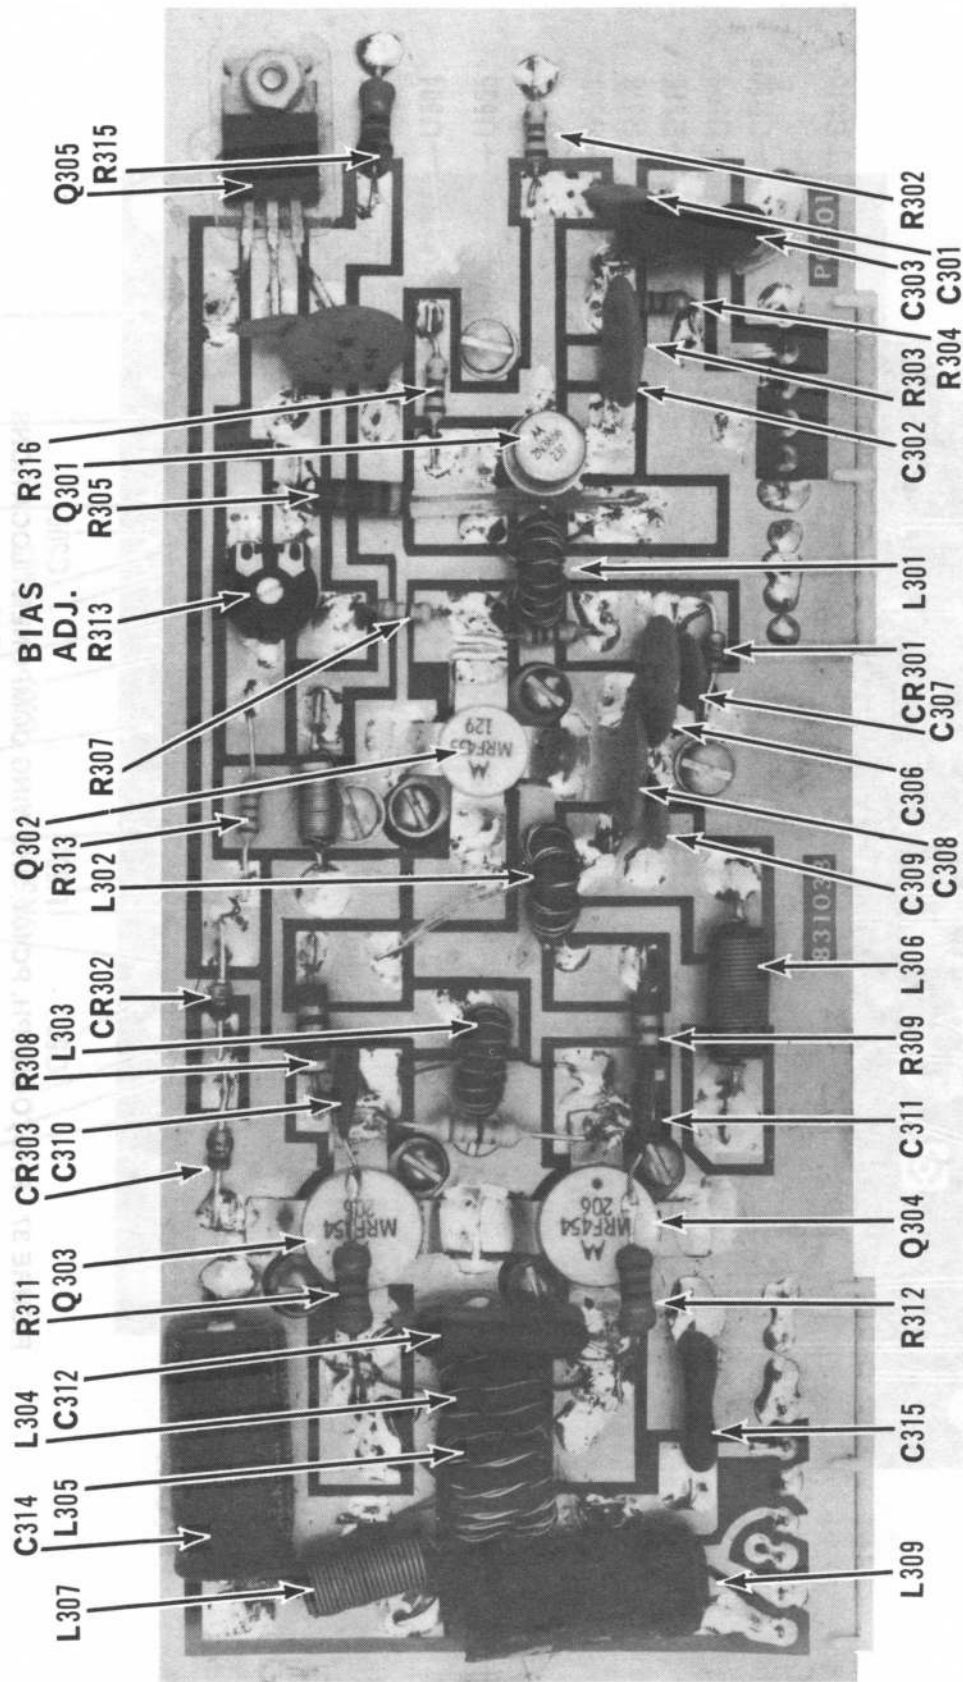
PHOTOGRAPH, PC301, SHOWING COMPONENT LOCATIONS
